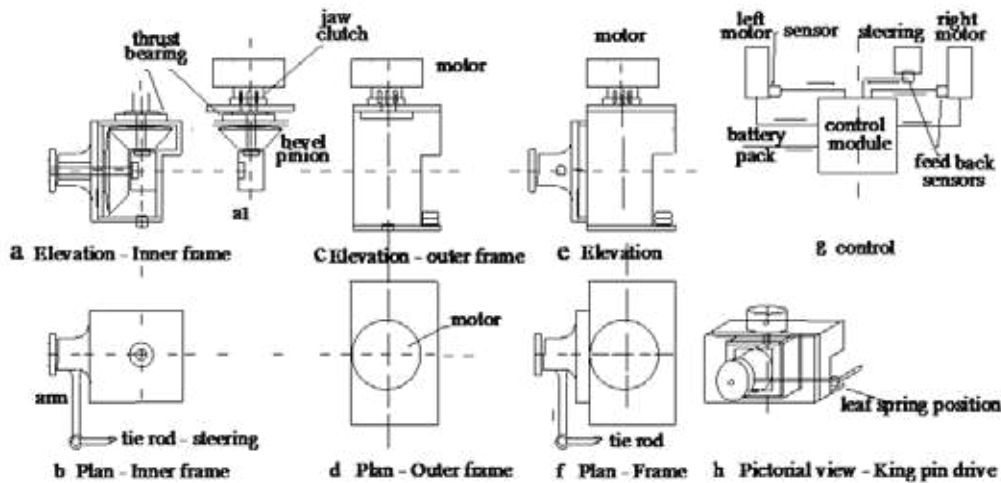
a and a1-Elevation of Inner frame, b-Plan, c- Elevation of Outer frame, d-Plan, e- Elevation of assembly, f-Plan, g-Control module, h-Pictorial view.
